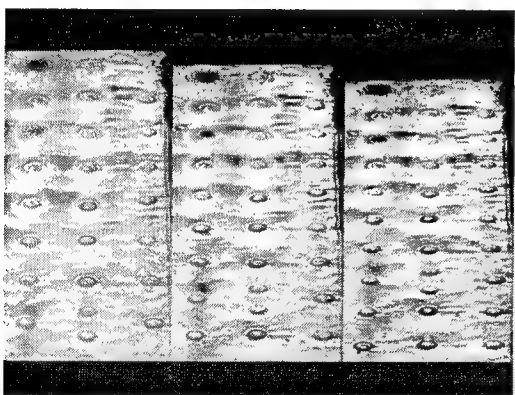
Imaging corroded rivets at 32, 27 and 22.5 deg. grazing angle
